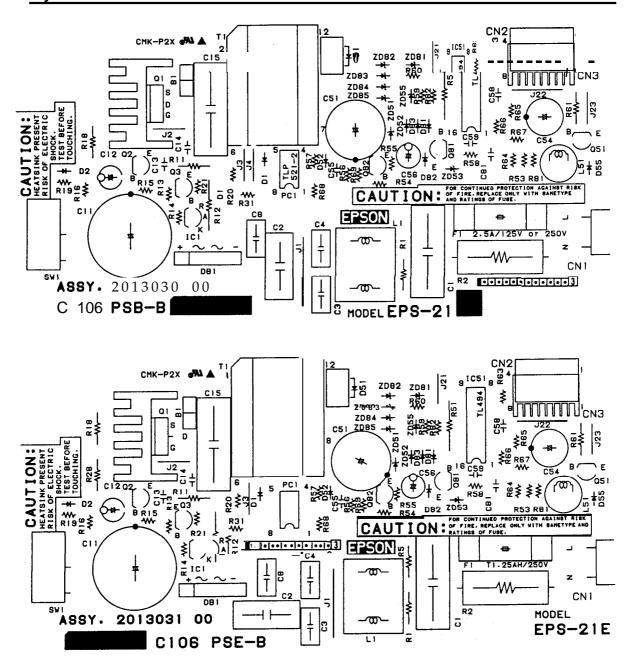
Cl06 PSB-B/PSE-B Board Component Layout
